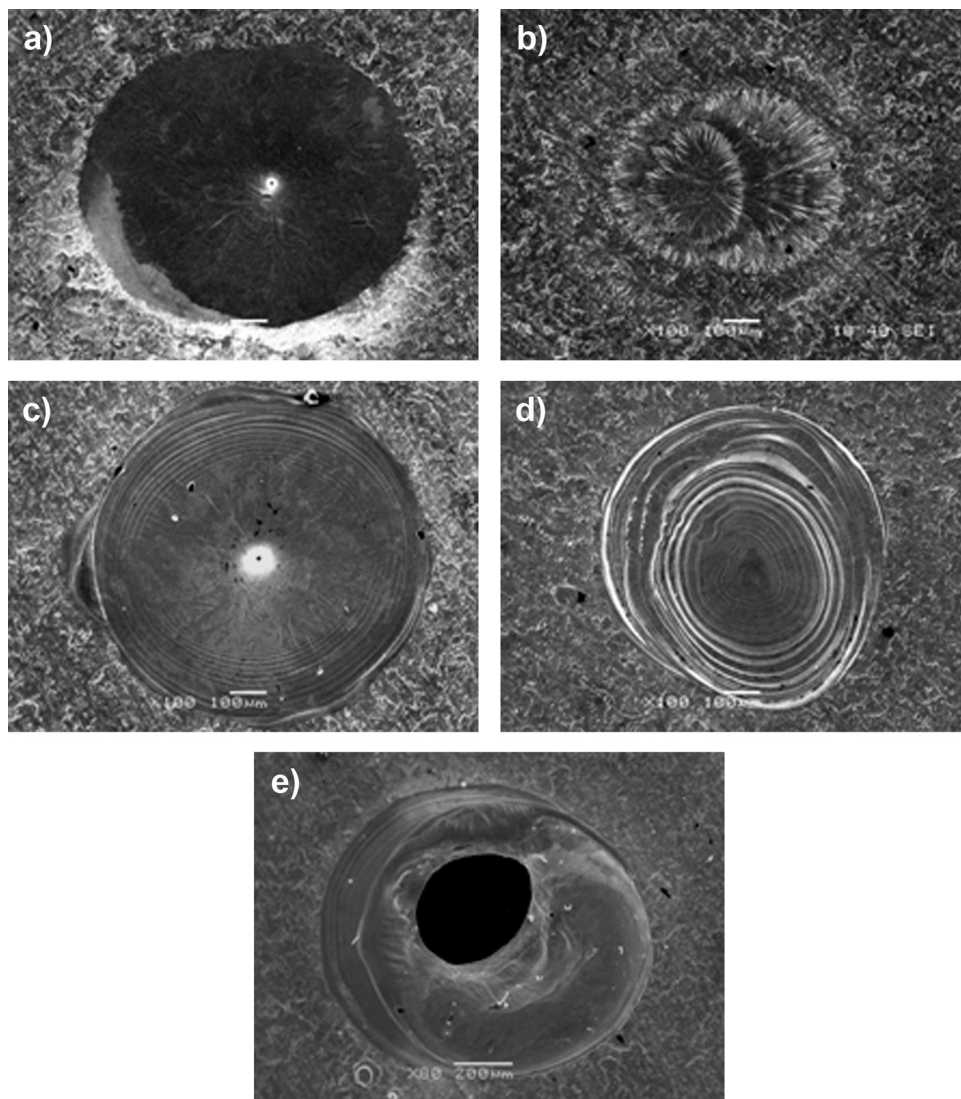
Top (a) and bottom (b) surfaces of welds made with 1.0kW peak power and 5 ms pulse without electrolyte. Top (c) and bottom (d) of welds made with electrolyte. Top (e) of weld made with electrolyte where sealing did not occur.
